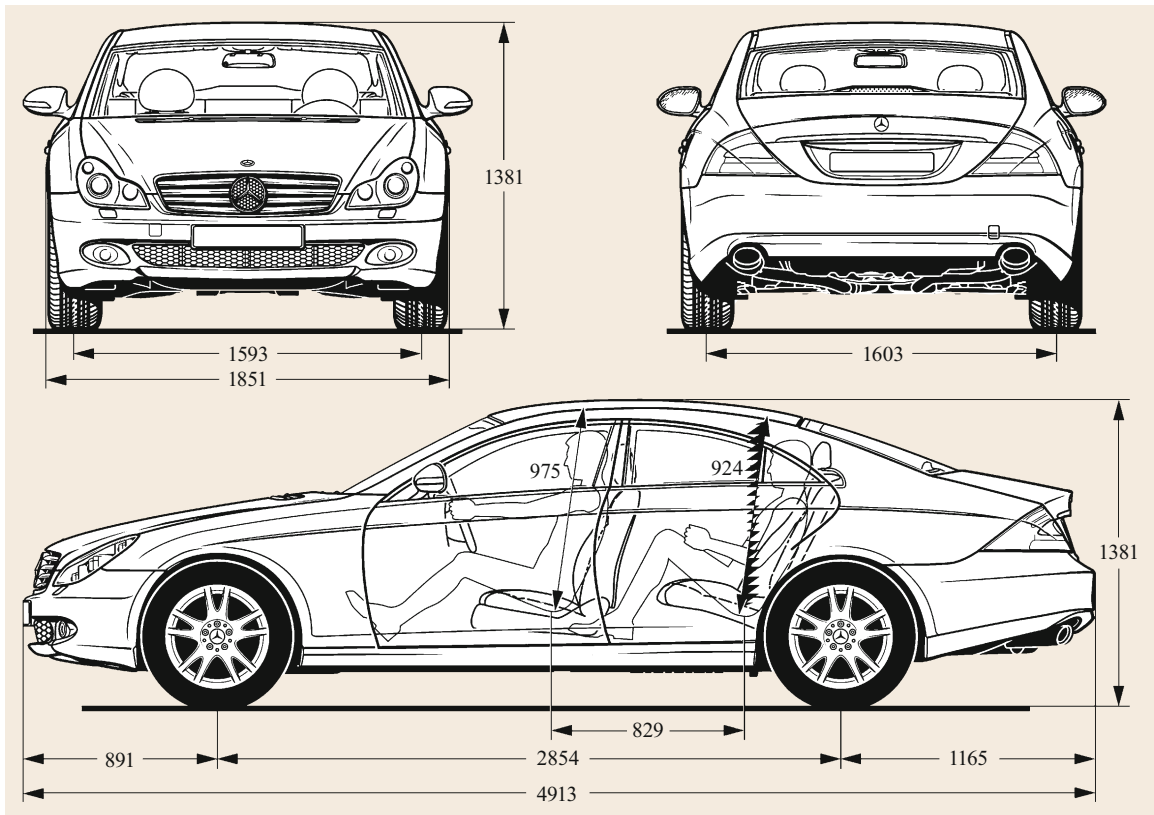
Dimensional concept of Mercedes CLS (courtesy of Daimler AG)
